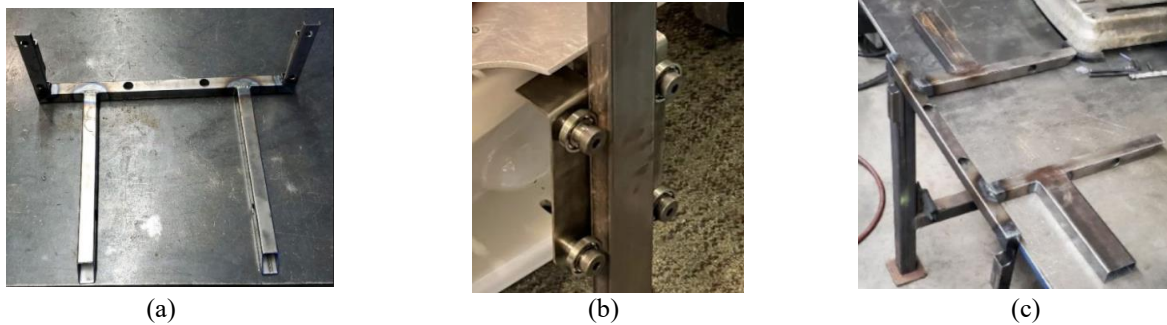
(a) bearing guide attachment fixture (b) assembled bearing guides on frame (c) bars welded to frame to attach seat plates
